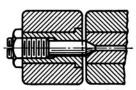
Pivot bearing with hardened conical-pointed pins.
